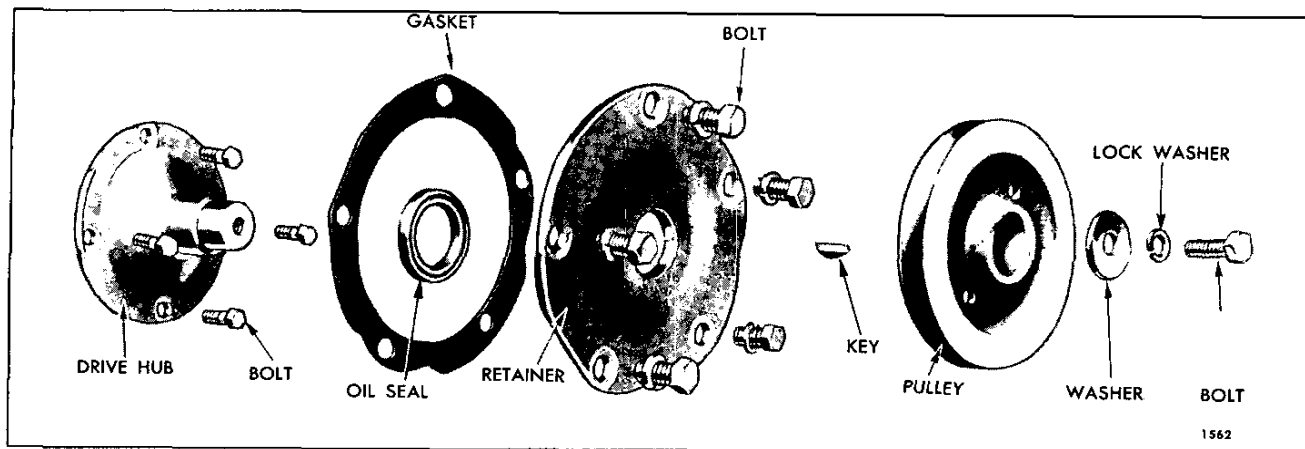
Components of Accessory Drive for Belt-Driven Accessory (Drive Hub Type)
